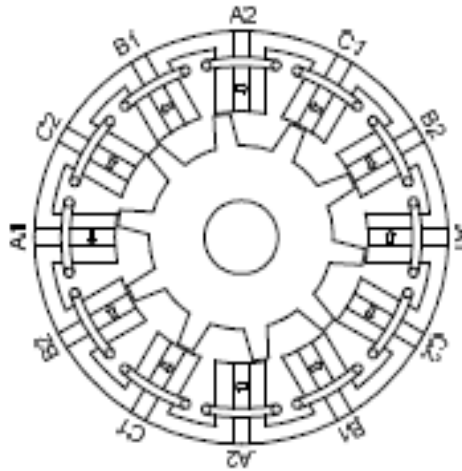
[6] Cross section view of a 12/10 PM excited FS machine
